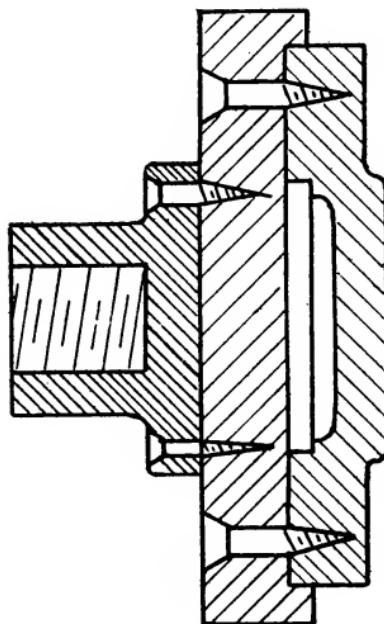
Section View Showing the Rechucked Cylinder Cover
